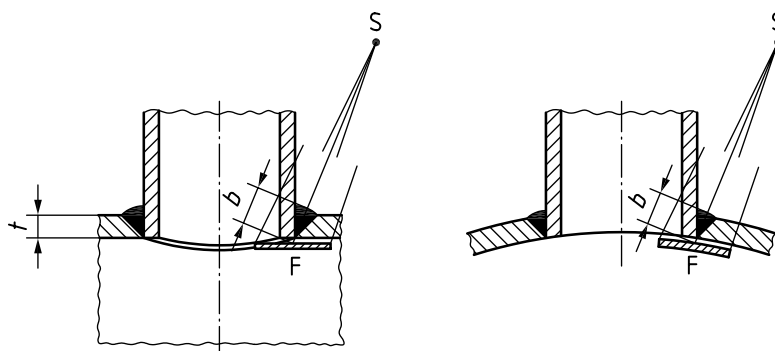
Arrangement for testing of set-in welds with the radiation source outside and the film inside
